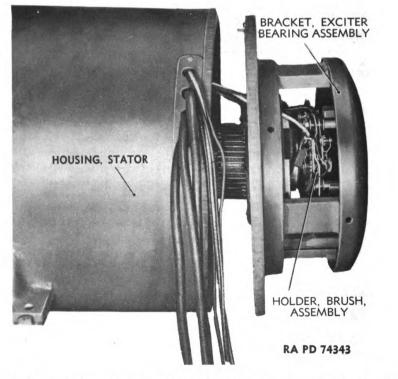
Exciter Bearing Bracket Removal - H. B. Co. Unit
